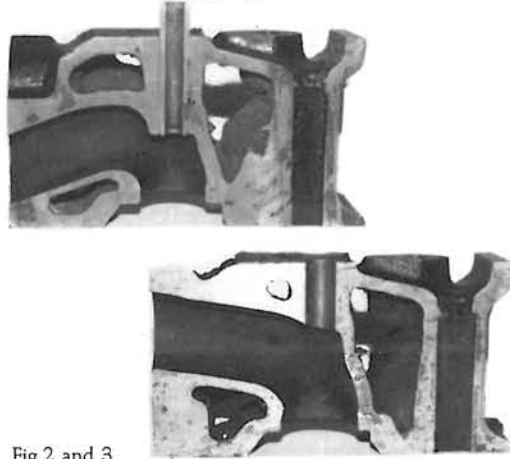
and 3 Cross sectioned ports of a 6-Cylinder engine cylinder head
